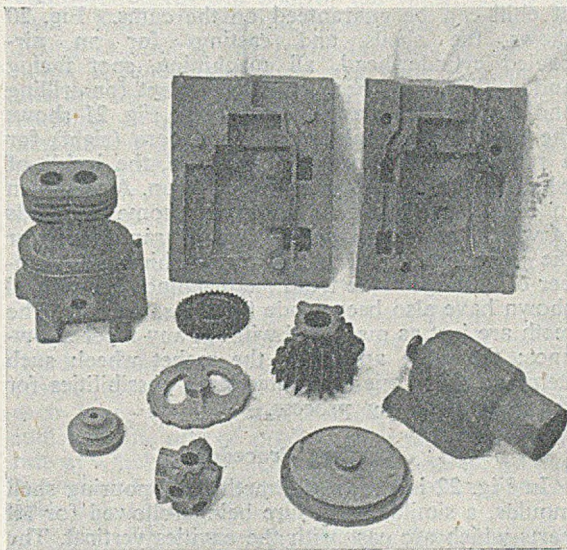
Shell Mould Halves (rear) and (right) Shell Core for a Refrigerator-compressor Crankcase. Grooved Pulleys, a Gear Wheel and Ratchet Wheel produced from Shell Moulds are also included in the Group.
